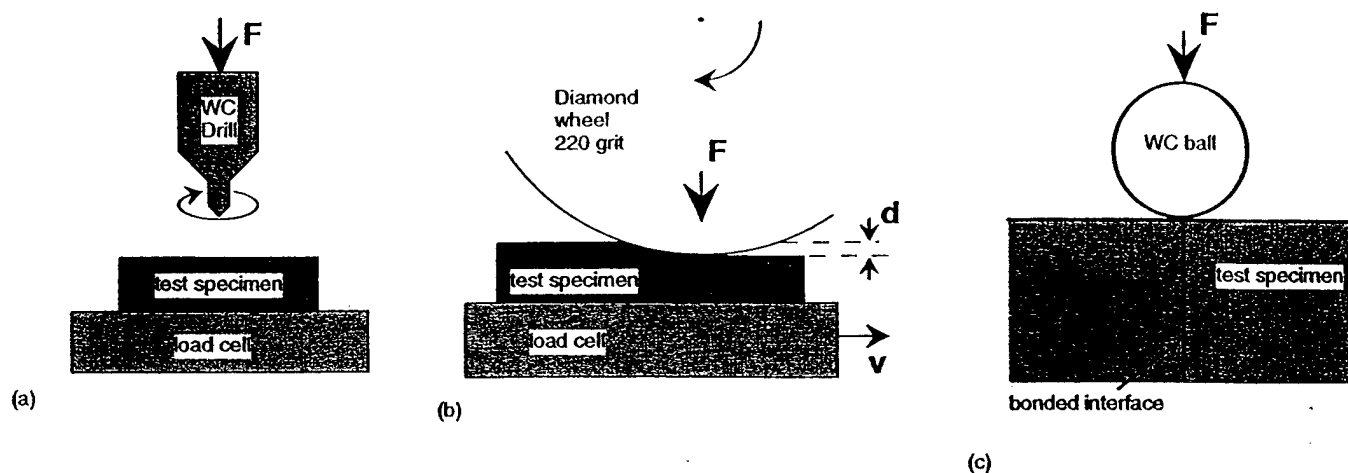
Schematic diagrams illustrating the test setup for (a) drilling measurements, (b) grinding measurements, and (c) ball indentation measurements using a bonded interface specimen.
